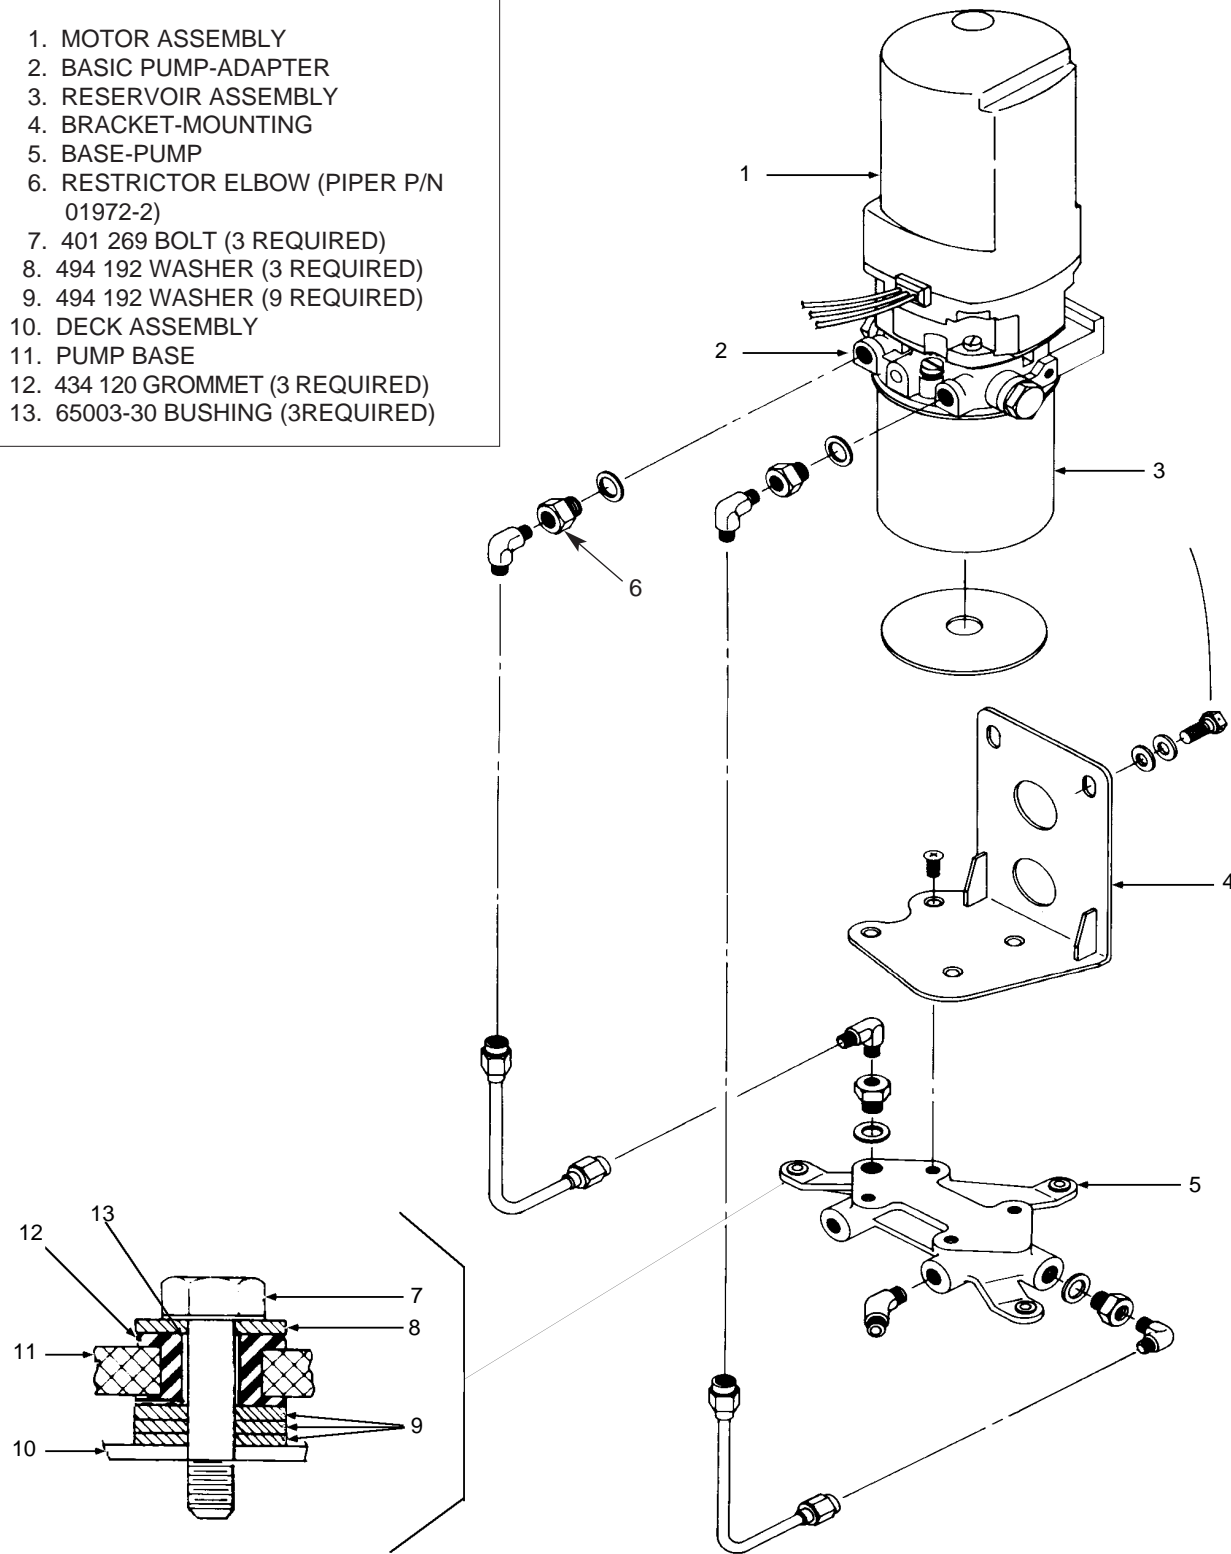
(Sheet 1 of 2) Oildyne Hydraulic Pump
